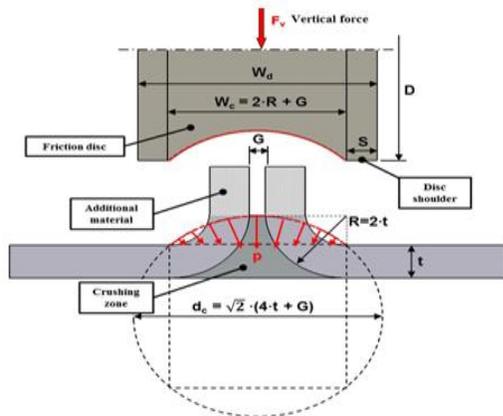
Tool geometry by Besler *et al.*, 2016 [1]
